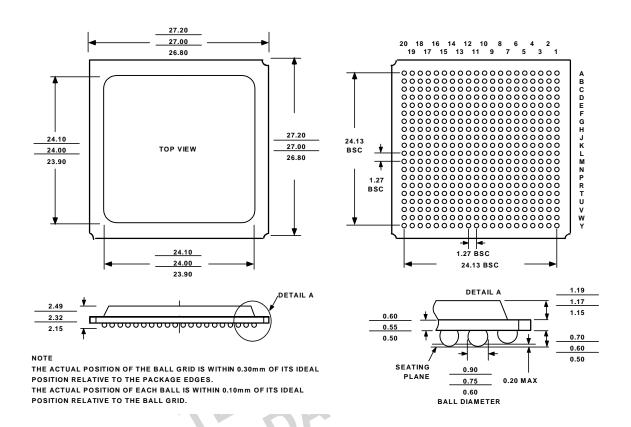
Package Dimensions Metric 27mm × 27mm, 400 ball PBGA
